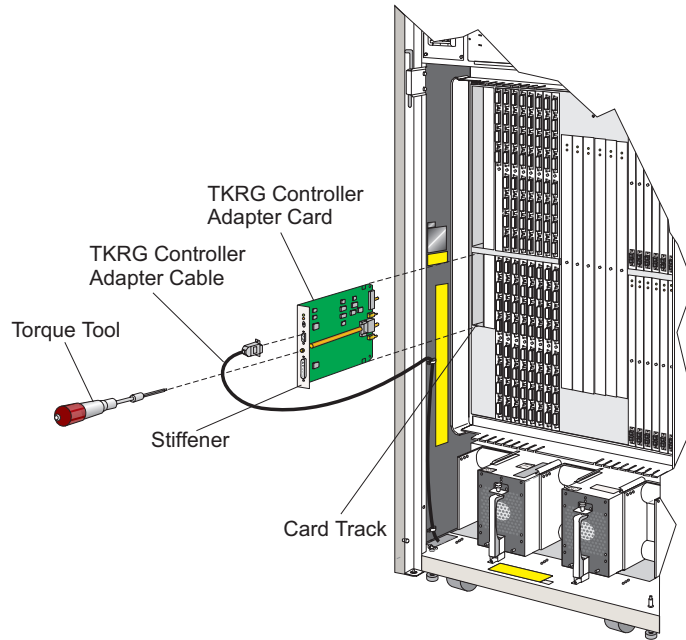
Token-Ring (TKRG) Controller Adapter Card, Nonredundant
